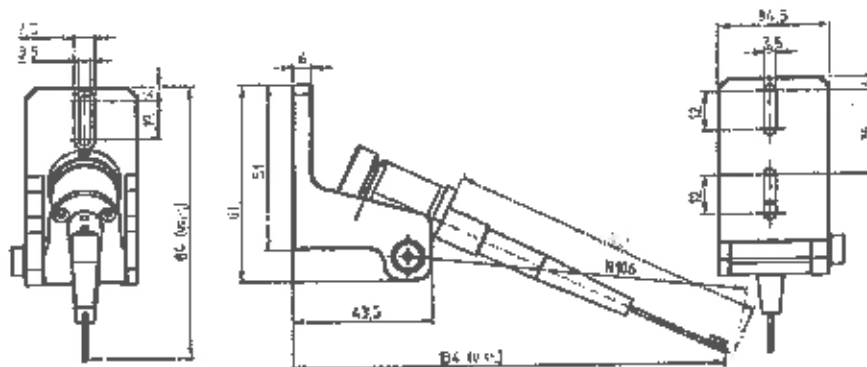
Dimensions of left sided probe assembly in [mm]. The right sided assembly has same dimensions.
